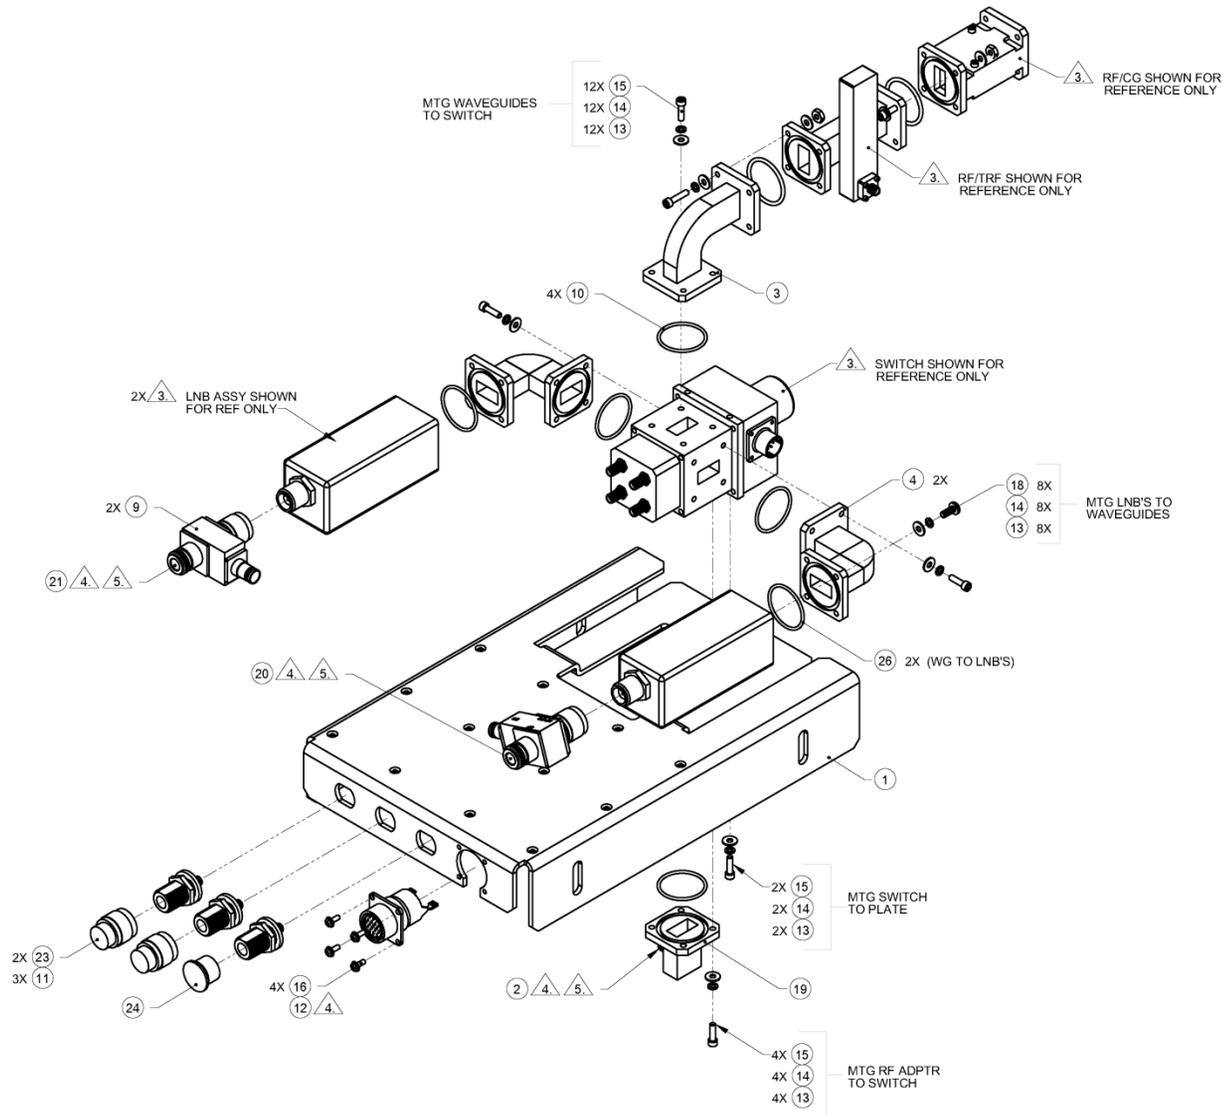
Ku-Band LNB 1:1 Redundant System (Exploded View)
